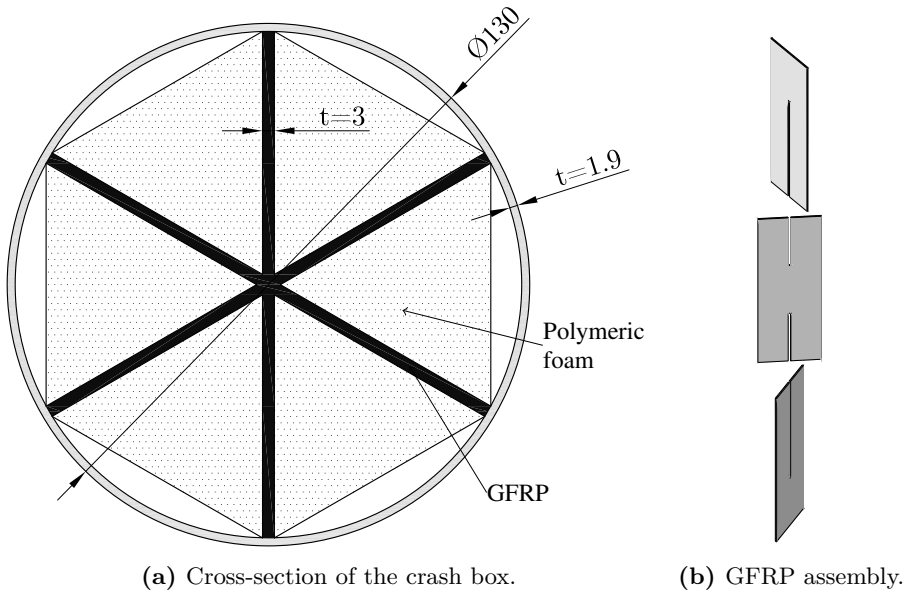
Cross-section of the proposed crash box made of aluminum (gray), polymeric foam (dotted) and GFRP plates (black) and assembly scheme. Dimensions in millimeters.
